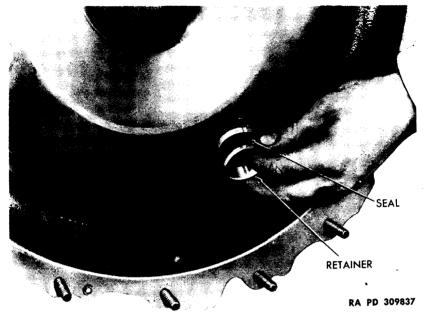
Installing Cranking Motor Shaft Oil Seal and Retainer
